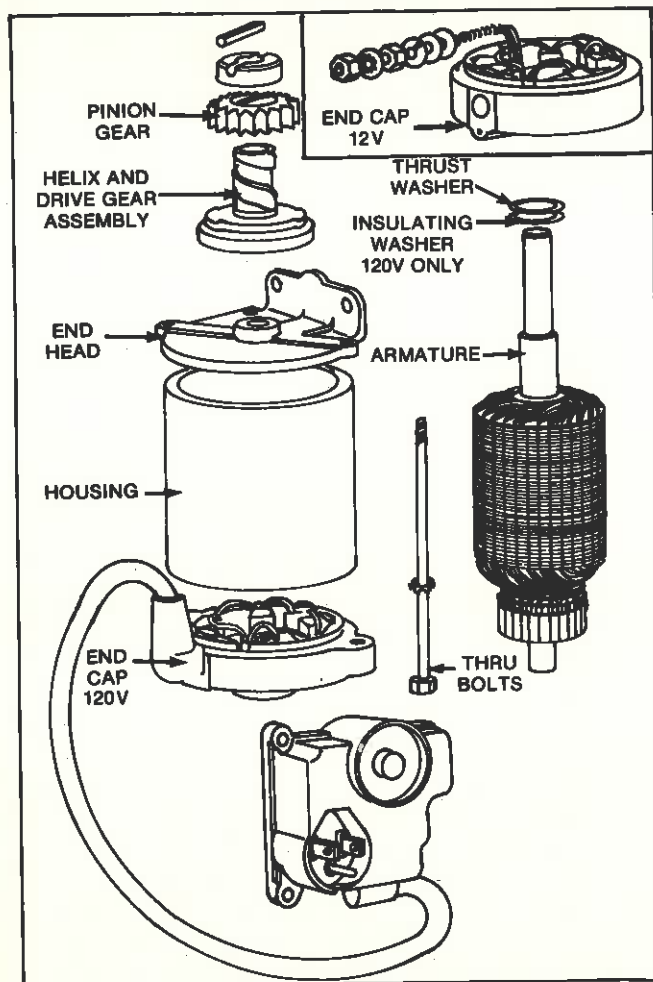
12 Volt & 120 Volt Starter Motor — Exploded View
